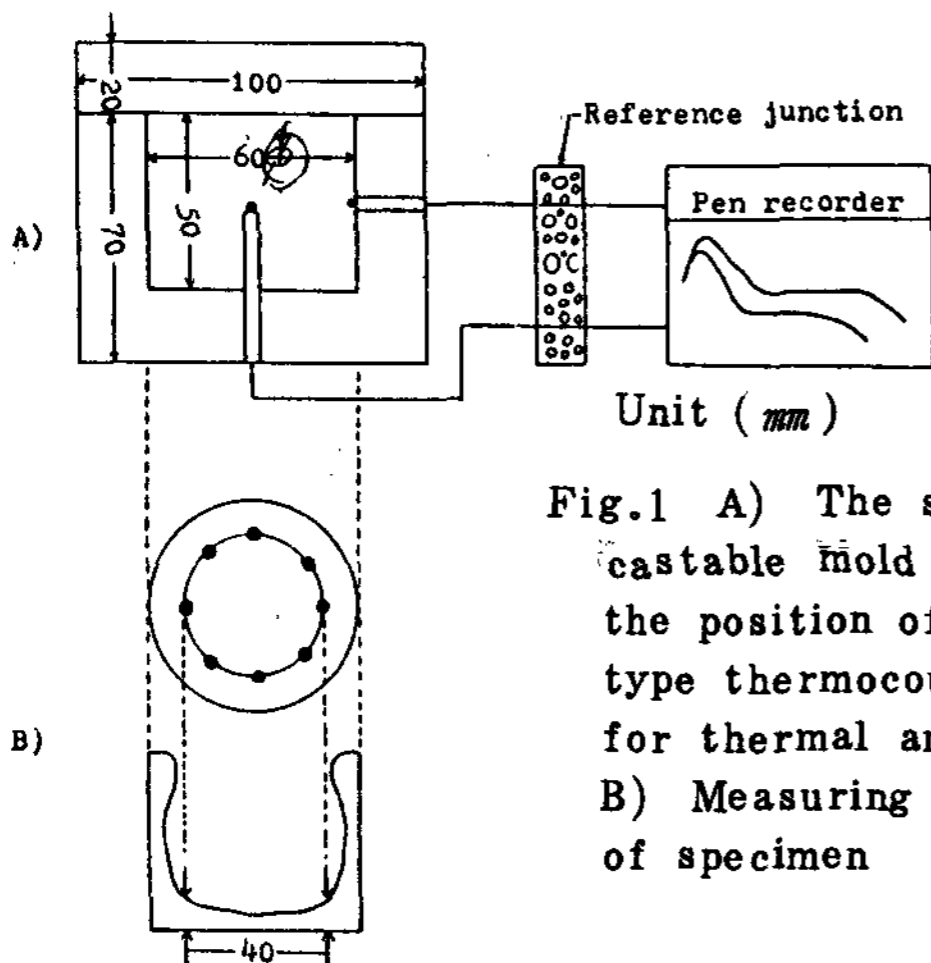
A) The size of castable mold and the position of CA K type thermocouple for thermal analysis B) Measuring points of specimen
